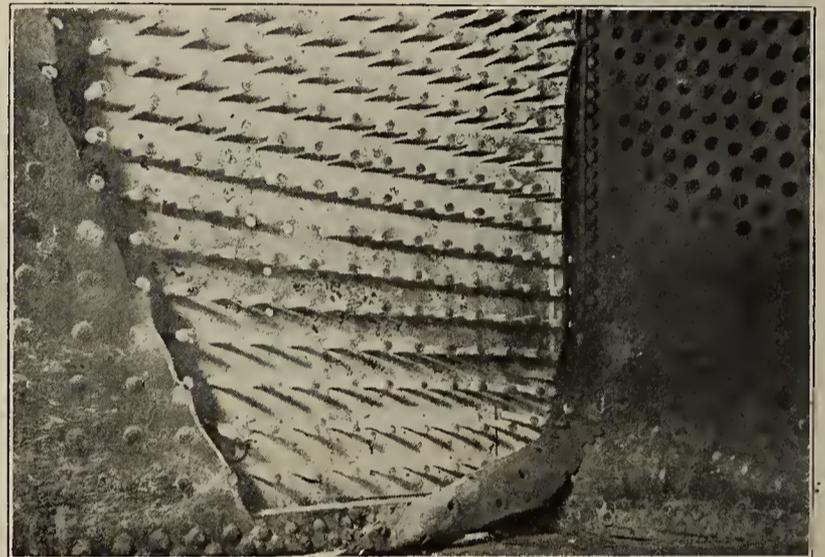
LOWER LEFT FORWARD CORNER OF FIREBOX—TWO VACANT STAYBOLT SPACES ARE FROM STAYBOLTS THAT WERE REMOVED FOR TEST PURPOSES, AFTER BOILER HAD BEEN INSPECTED. ALL STAYBOLTS ARE SHOWN IN PLACE IN FIGURE 4.
